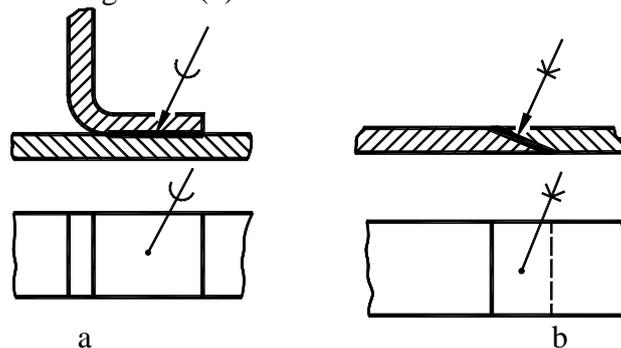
Drawing of the soldered (a) and glued (b) joints
